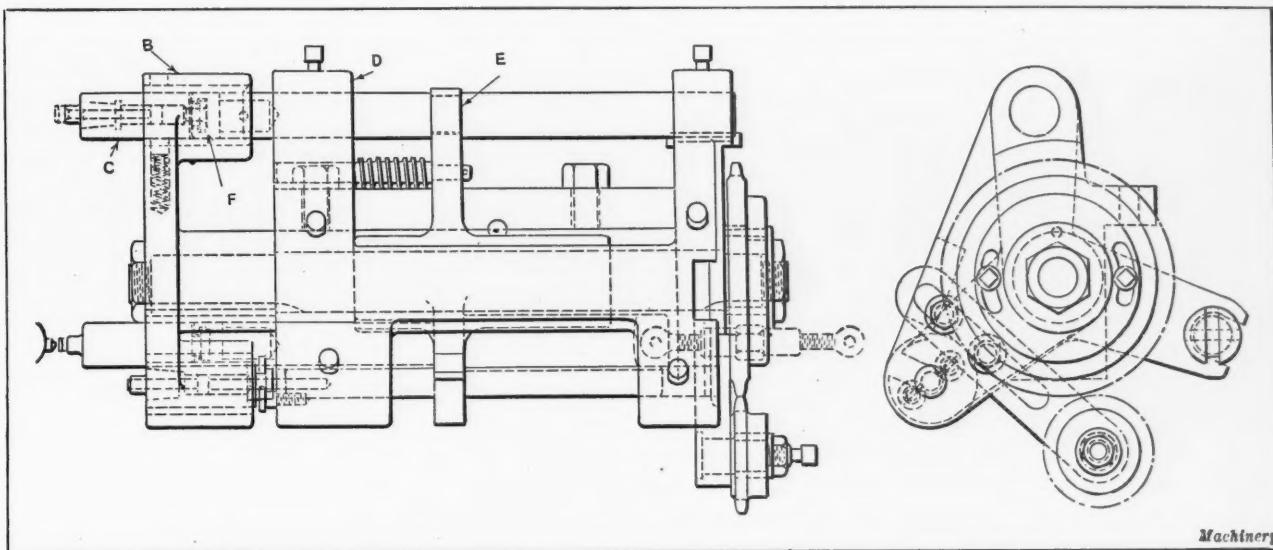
Attachment employed in Connection with the Saw Head shown in Fig. 1 for slotting the Heads of Screws
